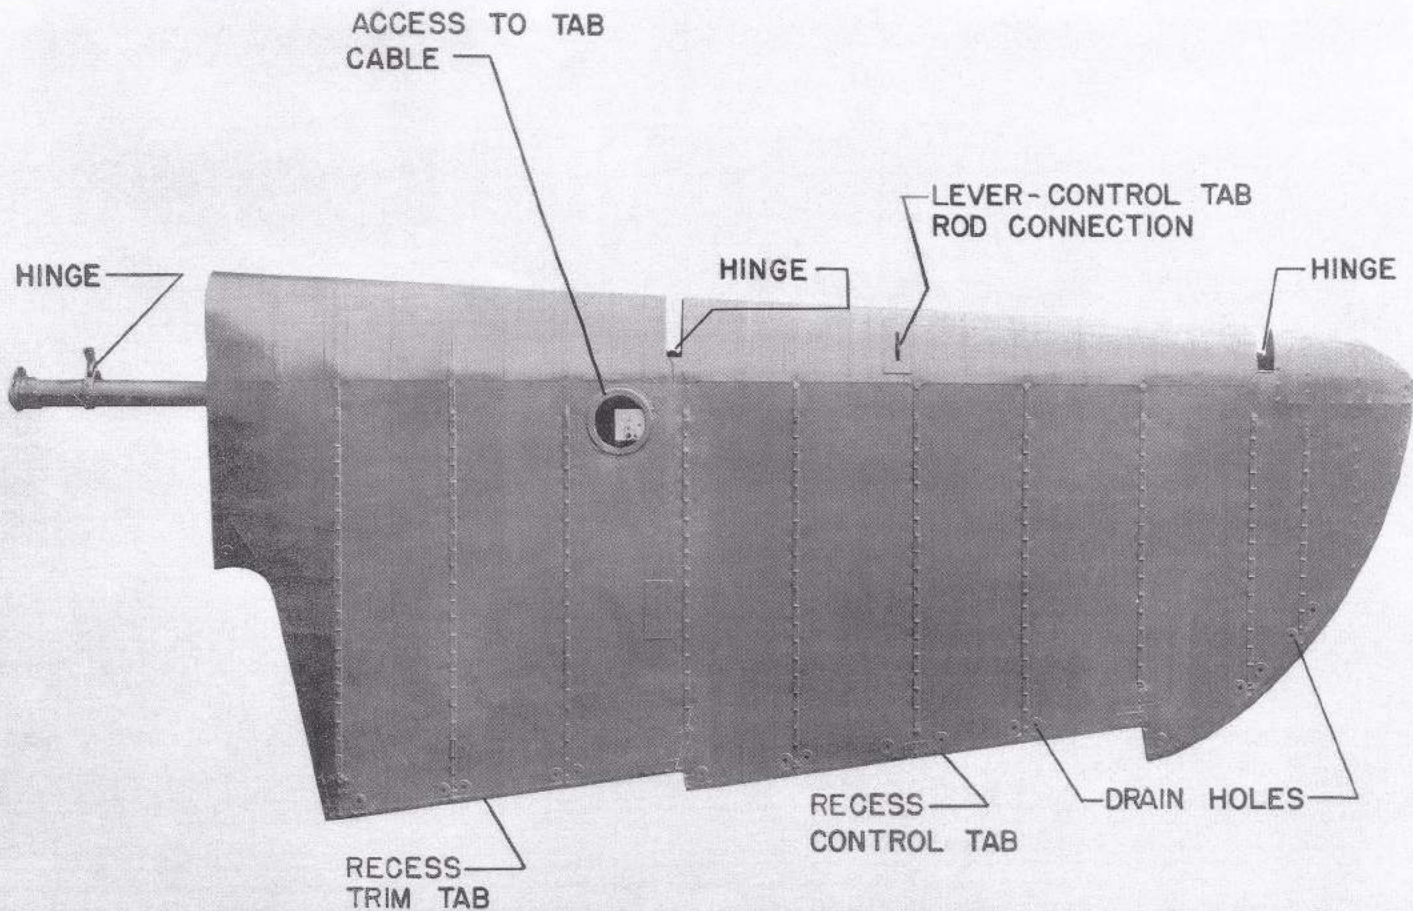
ELEVATOR PANEL - LEFT SIDE BOTTOM
